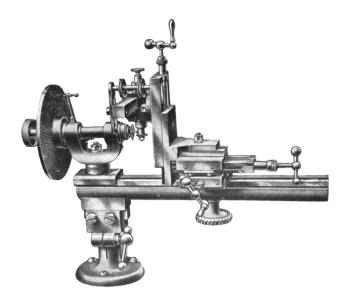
Fit-Up for Milling or Wheel Cutting
